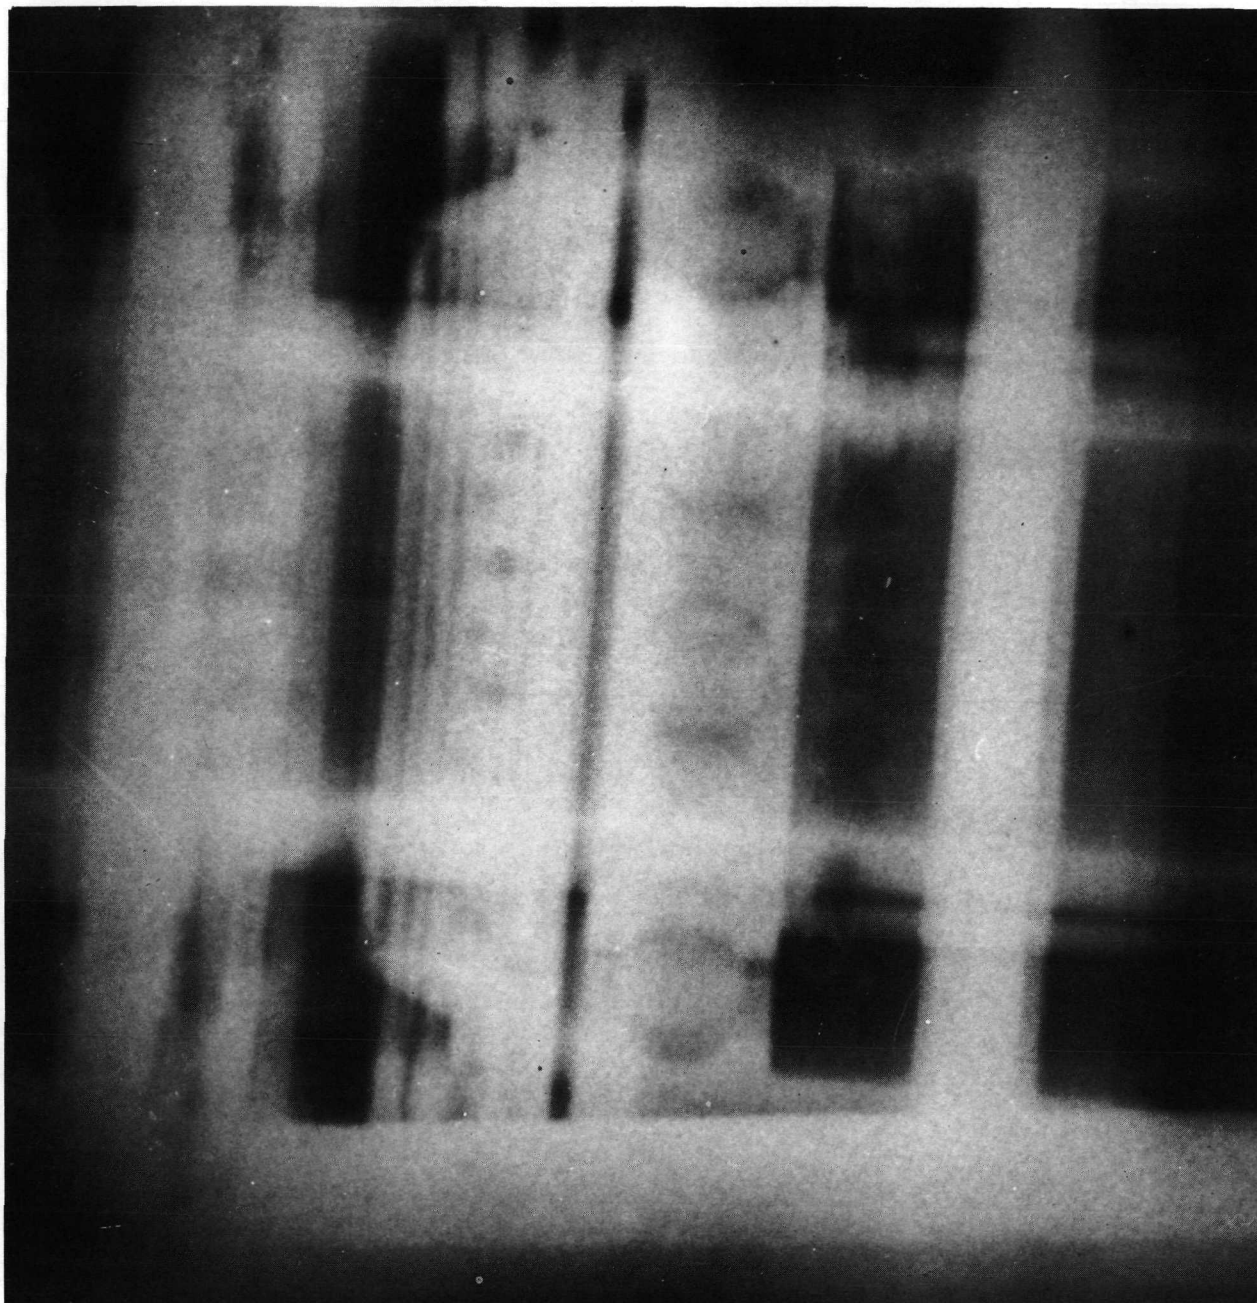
FLASH X-RADIOGRAPH OF SHAFT-BEARING-SEAL ASSEMBLY
